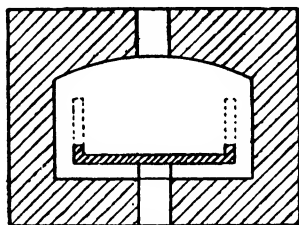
CROSS-SECTION OF OVEN FURNACE
